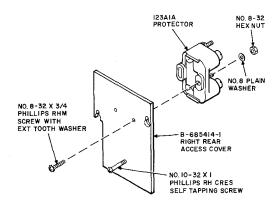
Assembly of 123A1A Protector on Right Rear Access Cover
